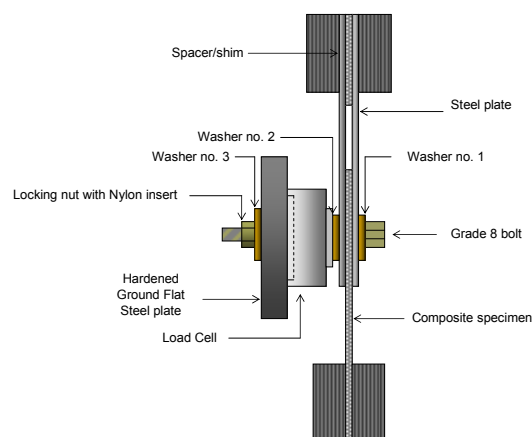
Test schematic for the double lap shear tests for composite/steel assemblies.
